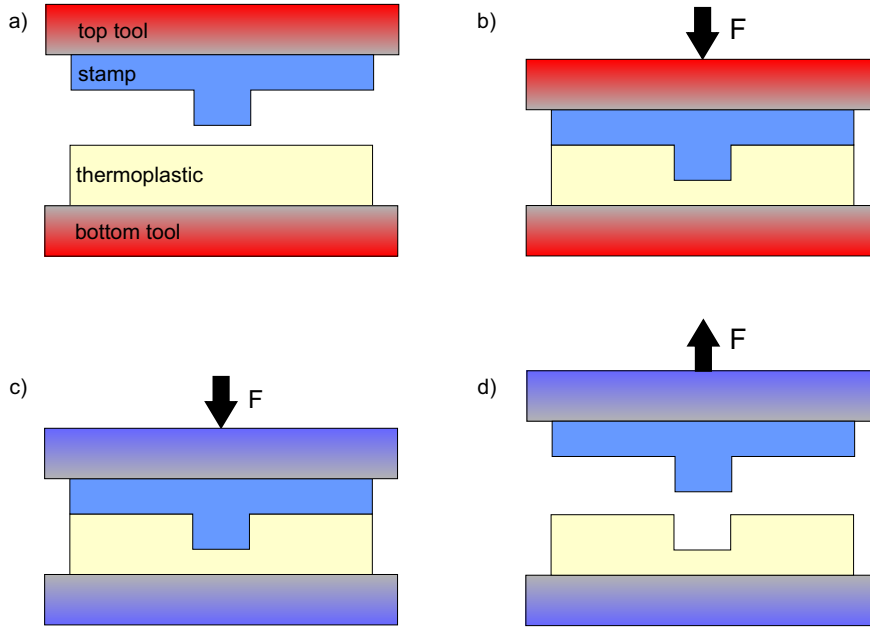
Hot embossing process steps: a) Heating step, b) embossing step, c) cooling step and d) demolding step.
